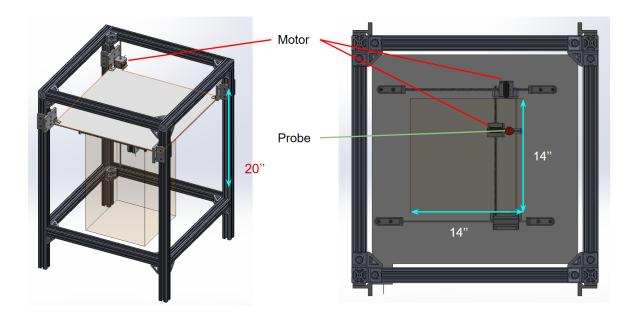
CAD model view (left) and bottom view (right), with orange transparent region indicating the probe's actuation dimensions.
